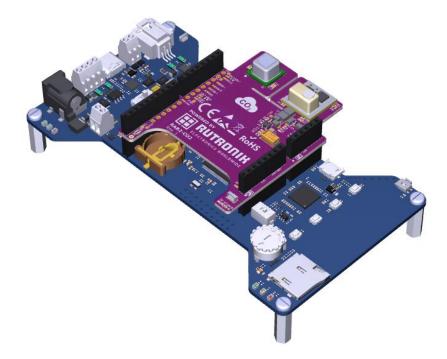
RAB2-CO2 board mounted on RDK2 Rutronik development board.
